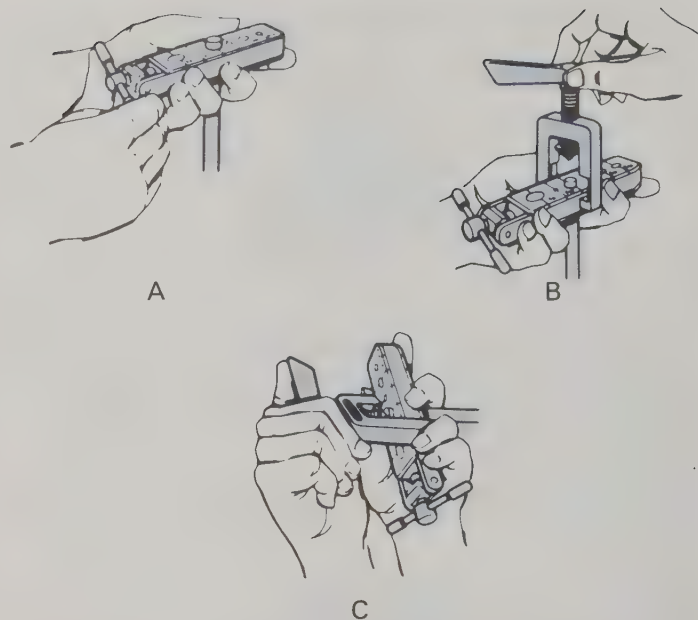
Forming a flare. A—The tubing is clamped in the flaring block. B—The yoke is slipped over the block and twisted into place. C—The adaptor is screwed down onto the tubing to form the flare. (Imperial Eastman)
